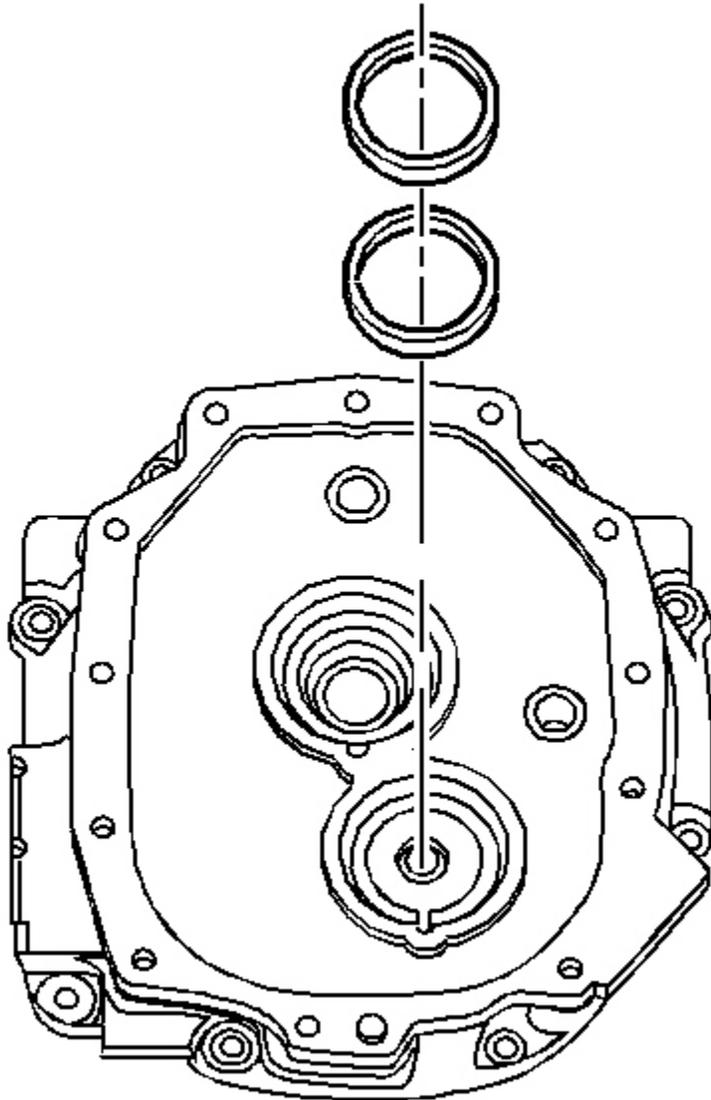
View Of Countershaft Bearing Shim & Bearing Race
